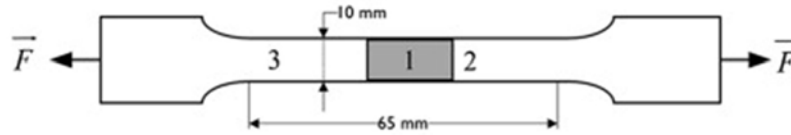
A transverse weld sample (1-weld, 2-HAZ, 3-base metal) [52].
